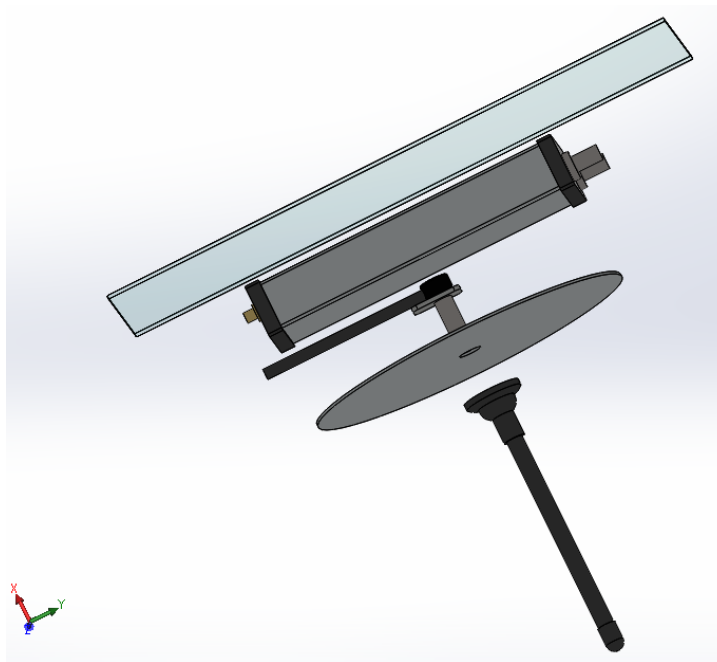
An exploded view of the measurement subsystem pointing downwards.
